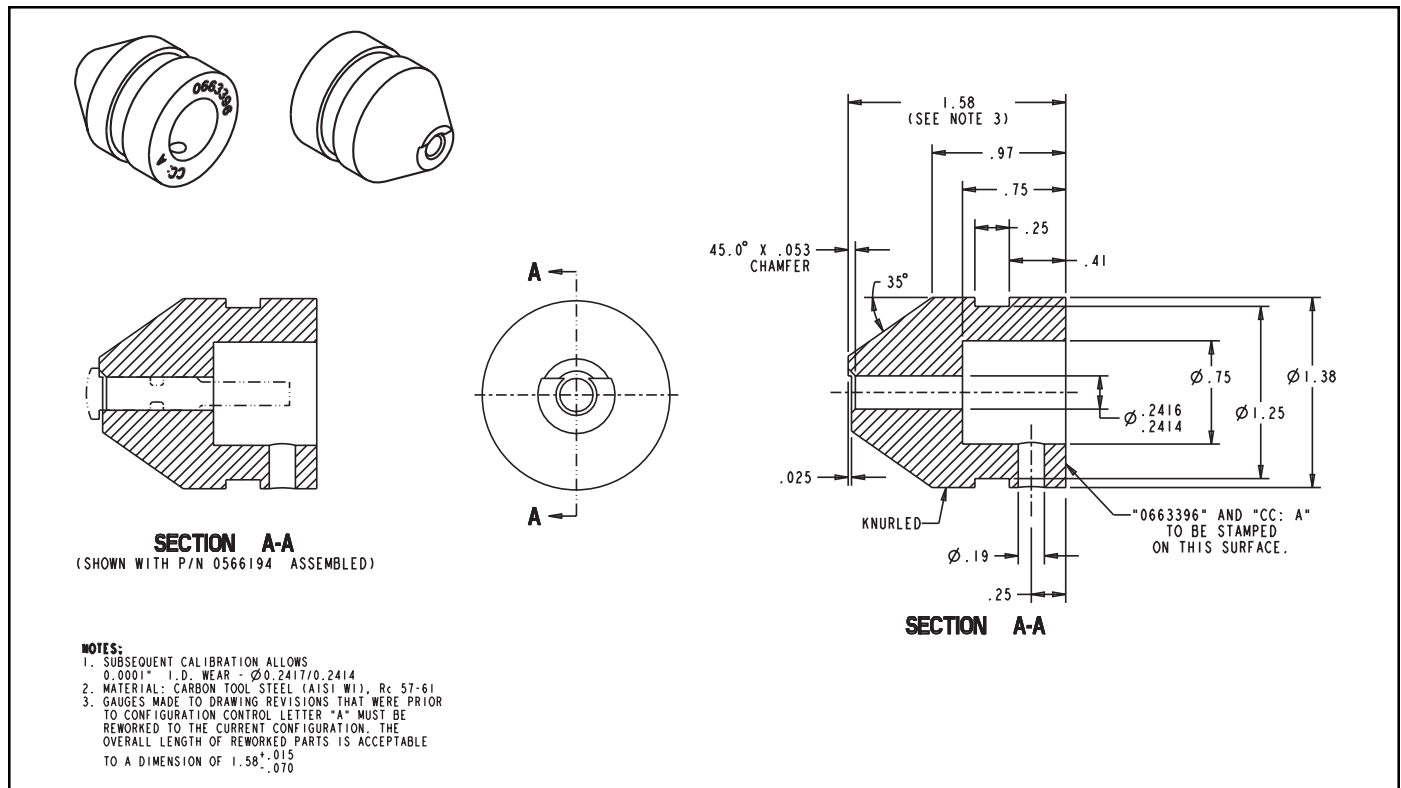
Dimensional Drawing - Service Accelerated Release Valve Gauge, Part No. 663396
